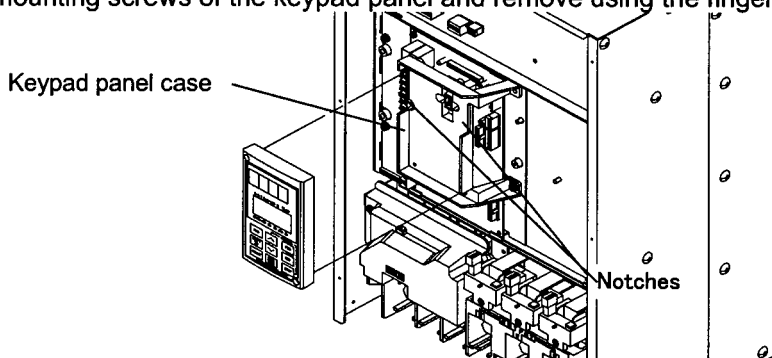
Removing the keypad panel (for inverter of 30kW or more)
